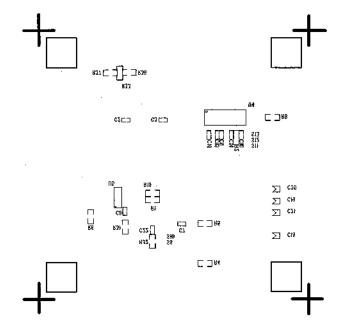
Printed Circuit Board Bottom Side Silkscreen
